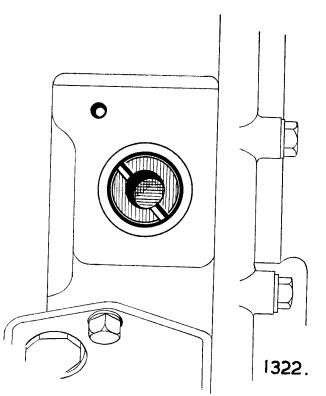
Showing the position of the distributor drive shaft offset when No. 6(front) piston is on Top Dead Centre.
